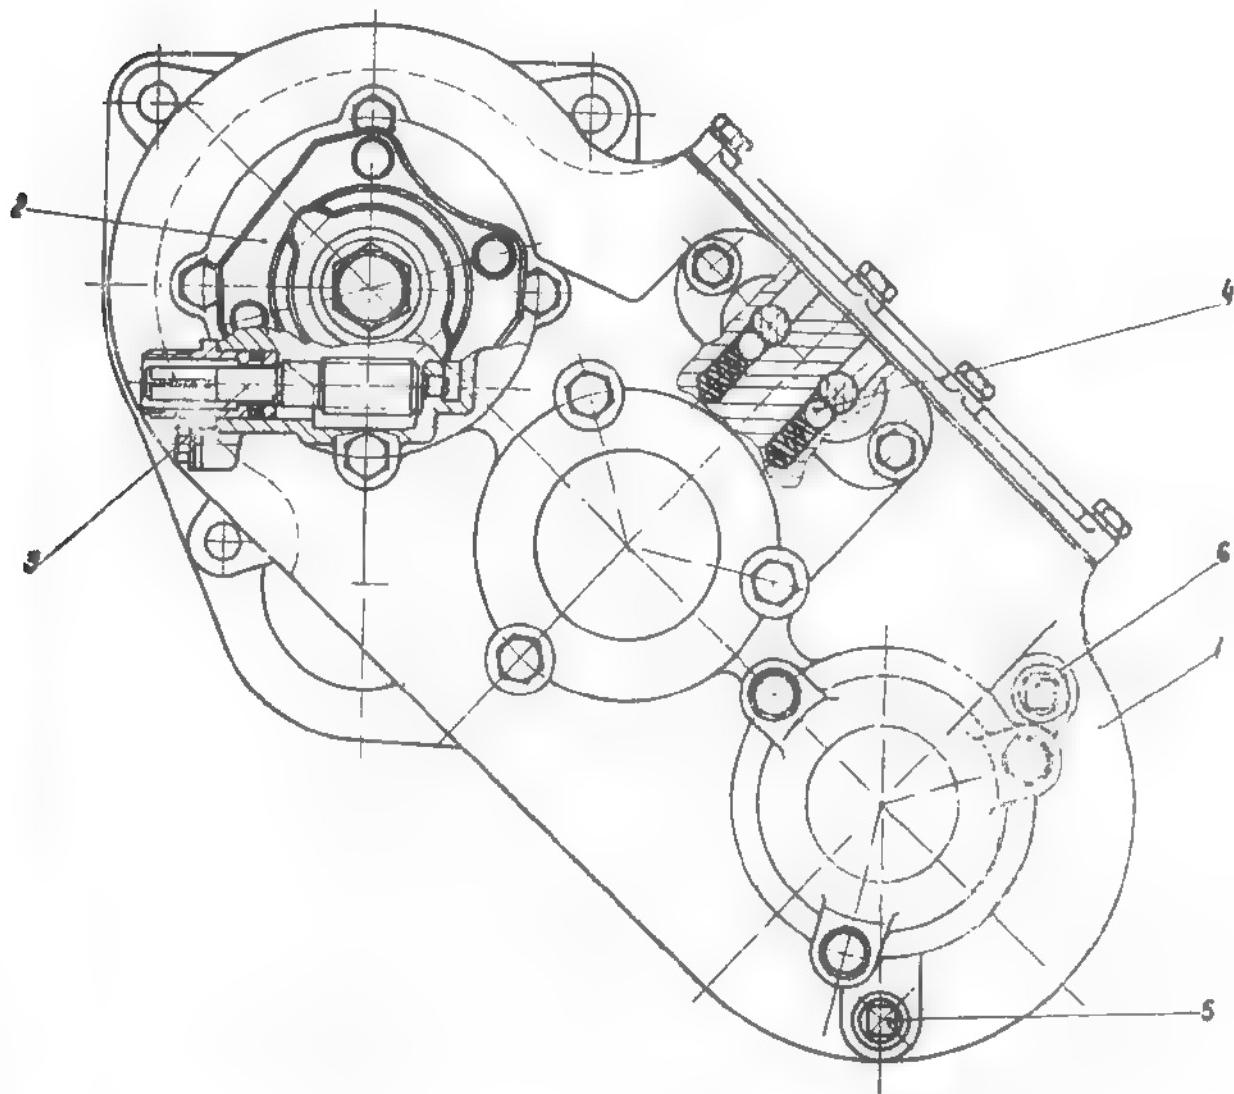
TRANSFER BOX - FRONT VIEW
